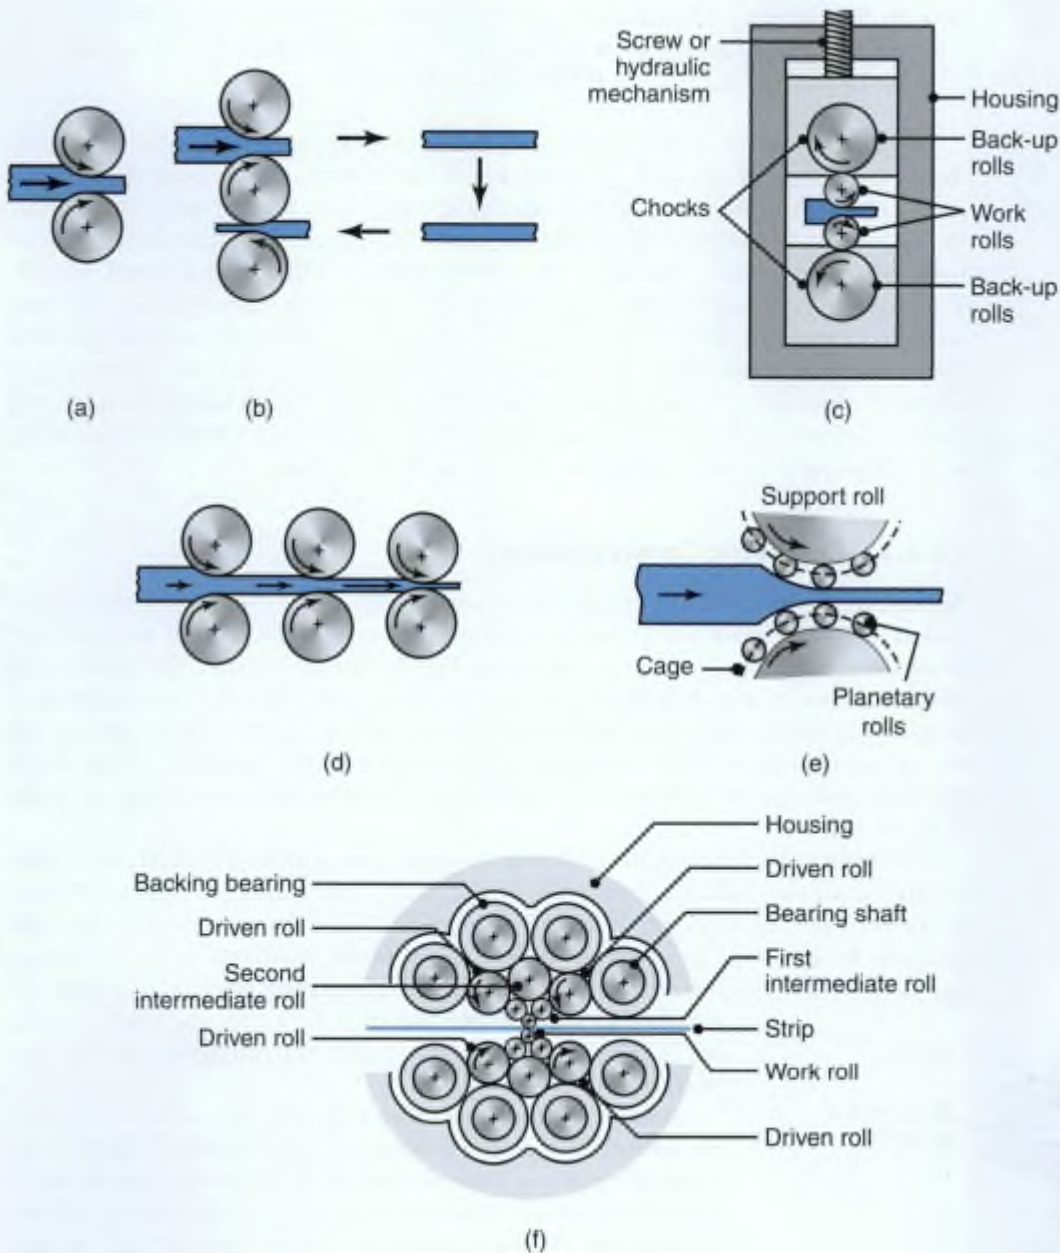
Schematic illustration of various roll arrangements: (a) Two-high mill; if a two-high mill is used for thick but short workpieces, it will commonly roll a billet back and forth in multiple passes, known as a *reversing mill*. (b) Three-high mill with elevator for multiple passes. (c) Four-high rolling mill showing various features; the stiffness of the housing, the rolls, and the roll bearings are all important in controlling and maintaining the thickness of the rolled strip. (d) Tandem rolling, with three stands. (e) Planetary mill, and (f) Cluster mill, also known as a *Senzimir* or *Z-mill*.
